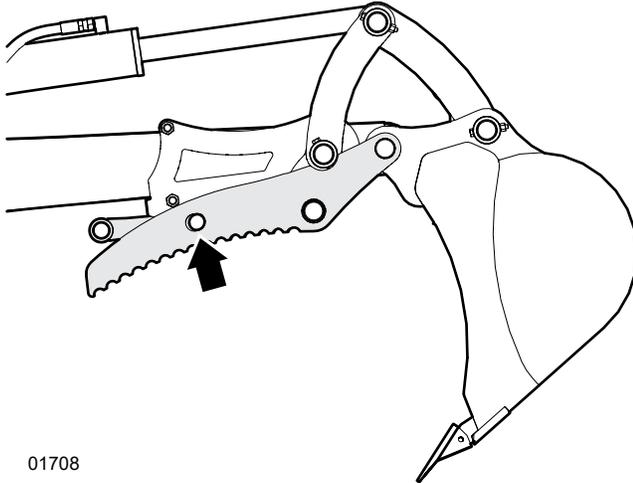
Lug weldment and mechanical-thumb bracket rear hole locations
